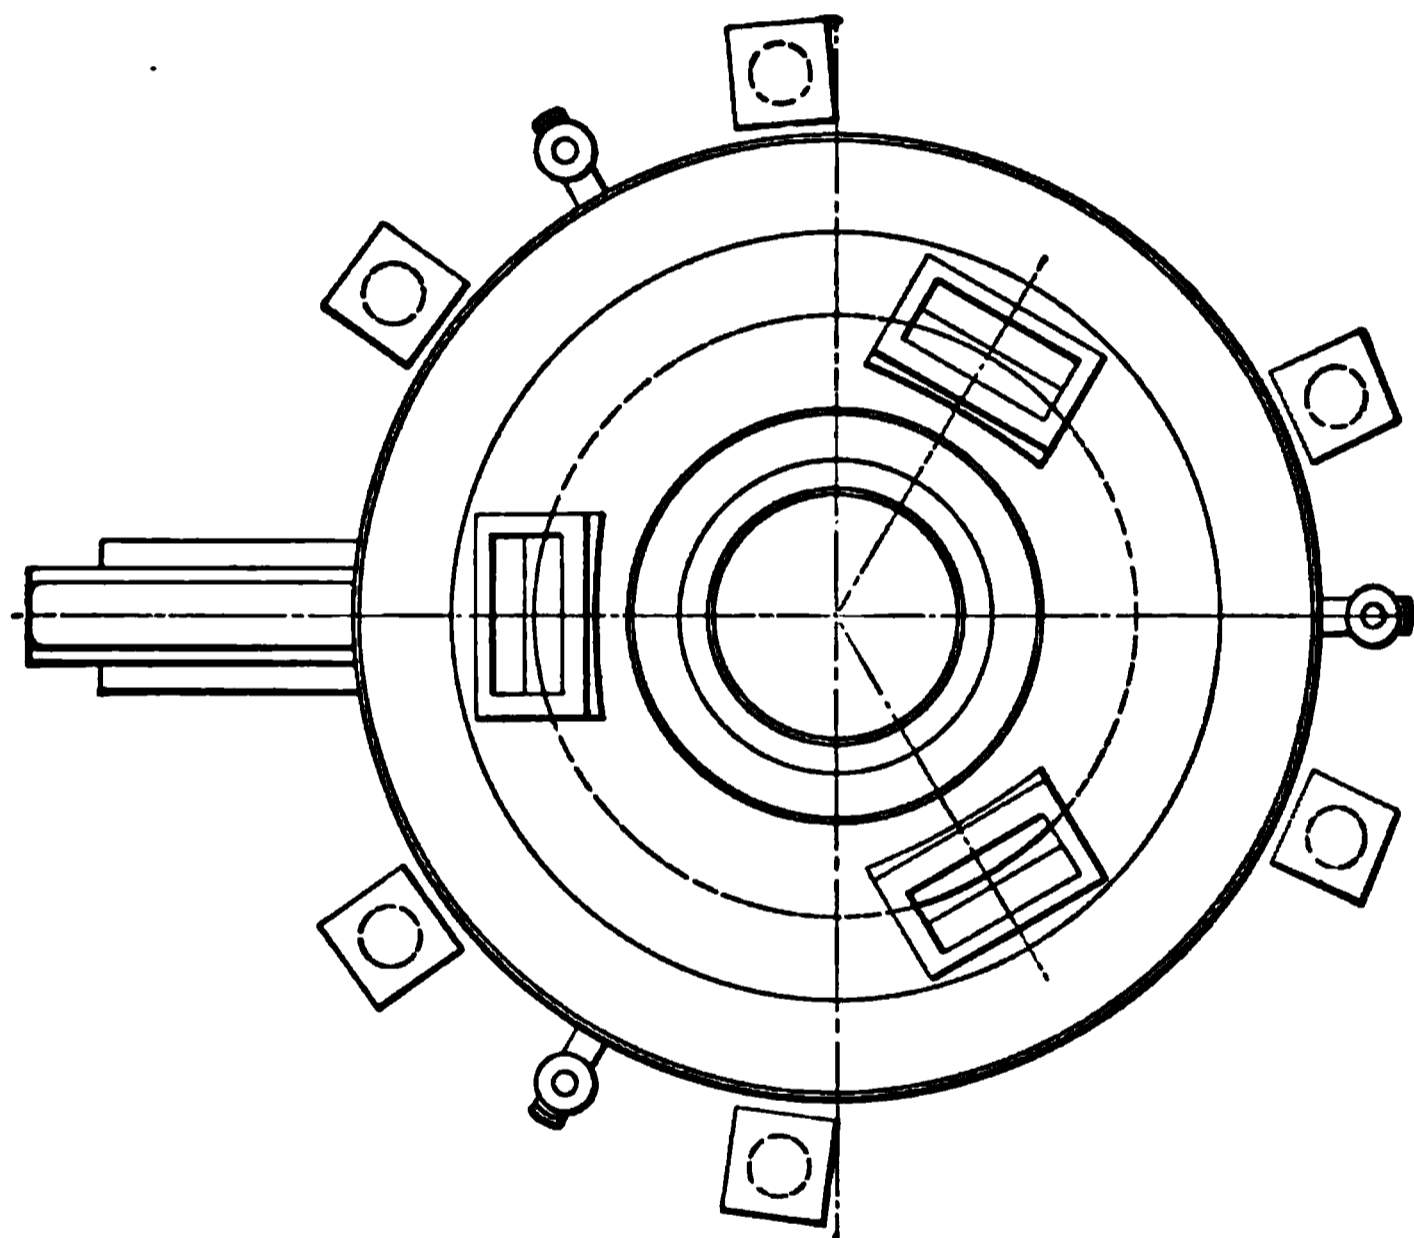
PLAN VIEW OF DOMNARFVET FURNACE WITH SHAFT AND ELECTRODES REMOVED.
